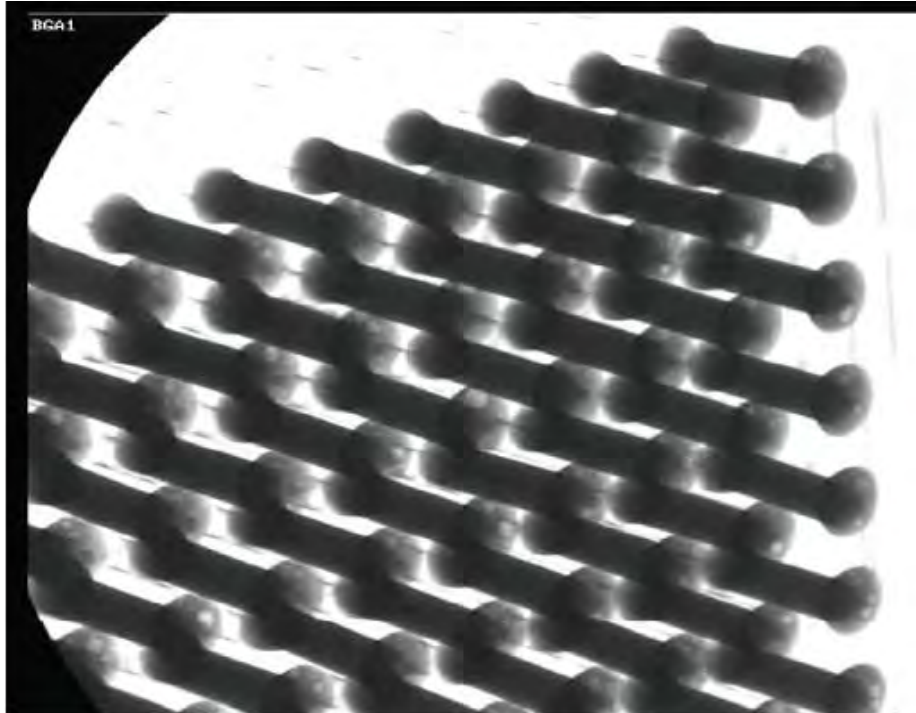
X-radiograph of CGA mounted on PCB showing solder bridge: Reject
